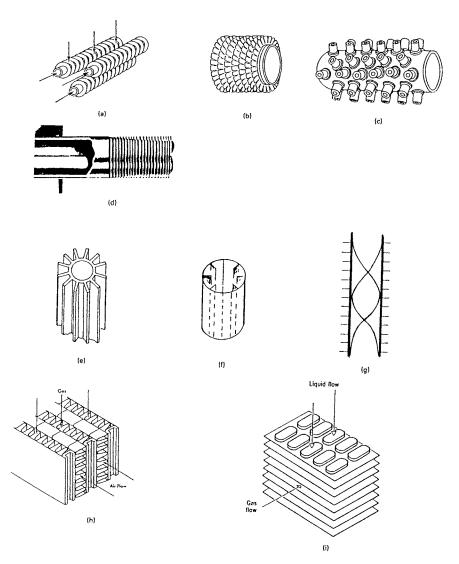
Examples of extended surfaces on one or both sides. (a) Radial fins. (b) Serrated radial fins. (c) Studded surface. (d) Joint between tubesheet and low fin tube with three times bare surface. (e) External axial fins. (f) Internal axial fins. (g) Finned surface with internal spiral to promote turbulence. (h) Plate fins on both sides. (i) Tubes and plate fins. Source: S. M. Walas, *Chemical Process Equipment: Selection and Design*, Butterworths Series in Chemical Engineering, 1988.
